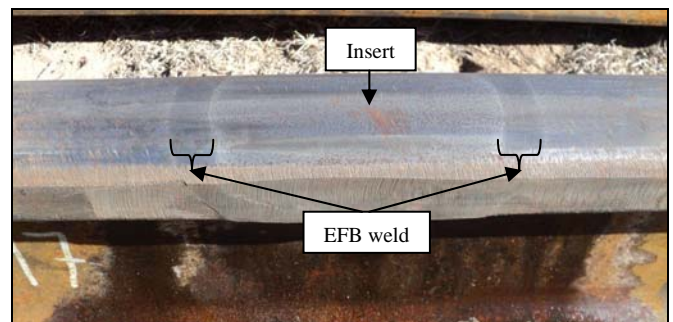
Completed Weld with etched Railhead revealing Running Surface Macrostructure
